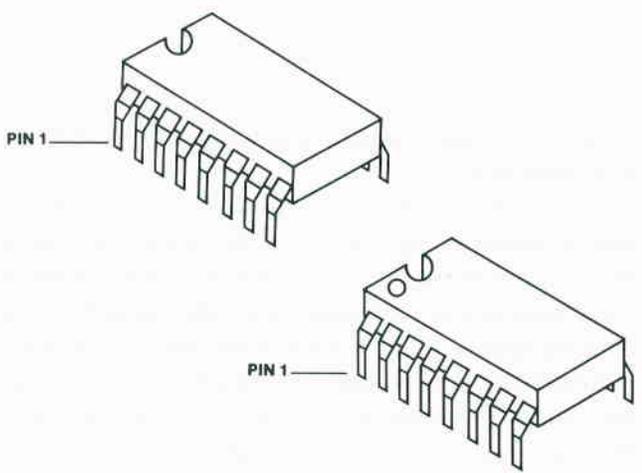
Locating pin 1 on integrated circuits (chips).
